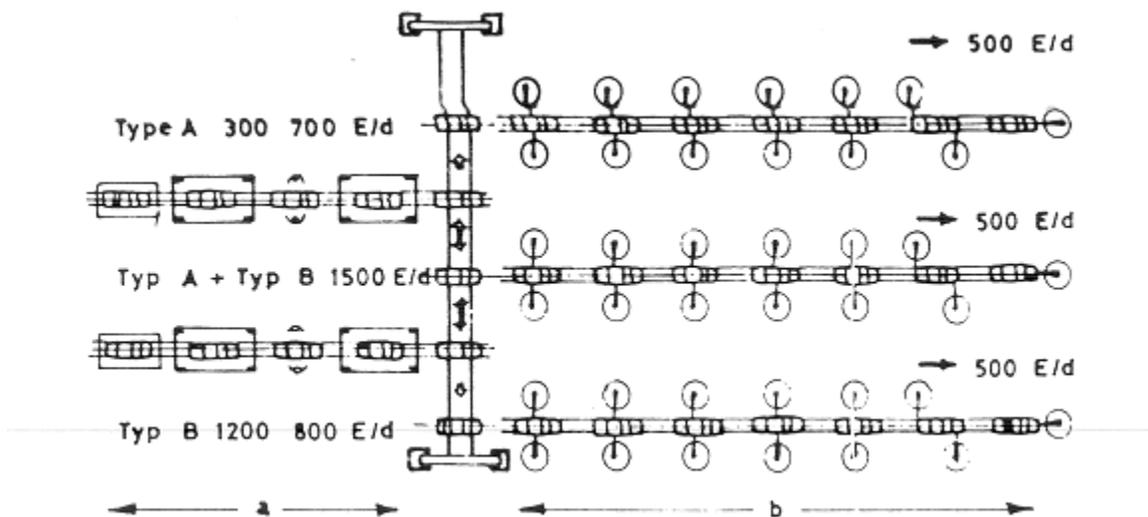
Model Specific Tacking and Flexible Spot Welding Lines
